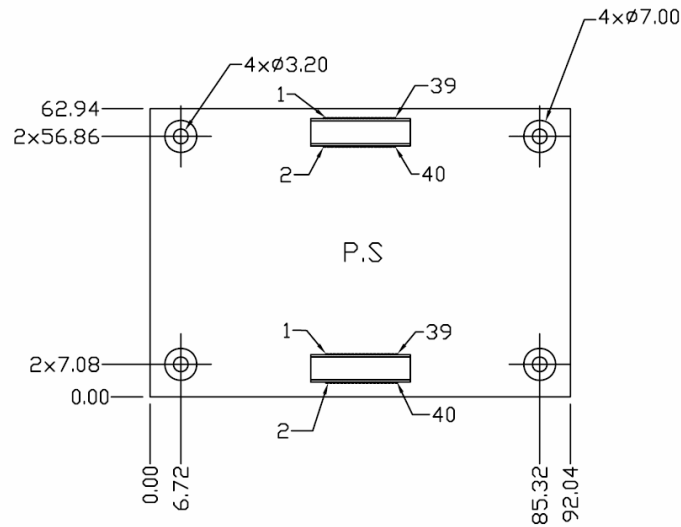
Mechanical drawing of the GPTiMe SMT version – bottom view
